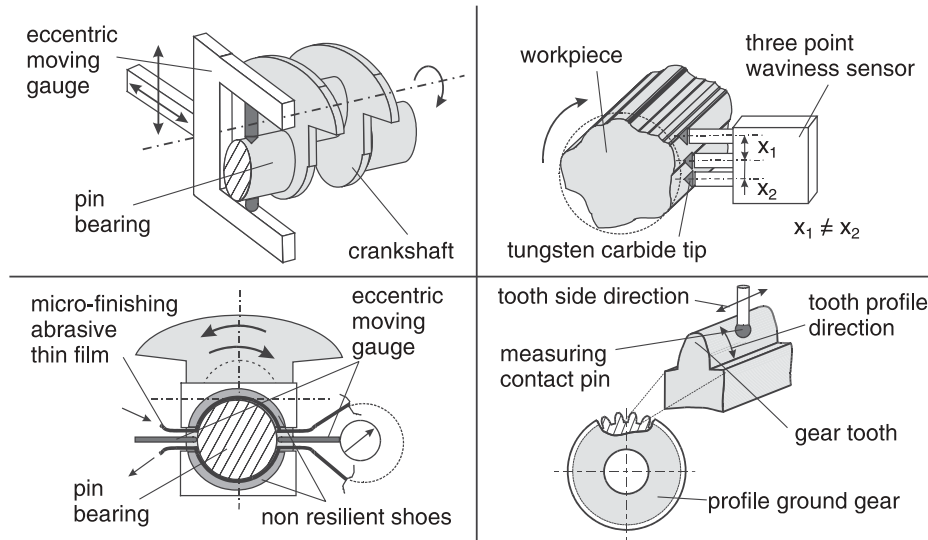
Contact sensor systems for workpiece macro-geometry
